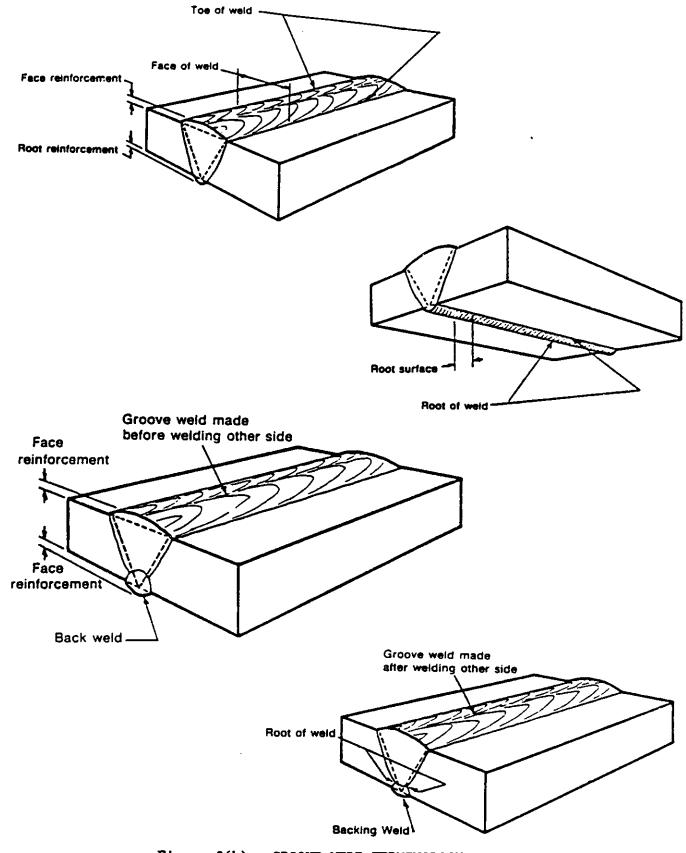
(b): GROOVE WELD TERMINOLOGY
